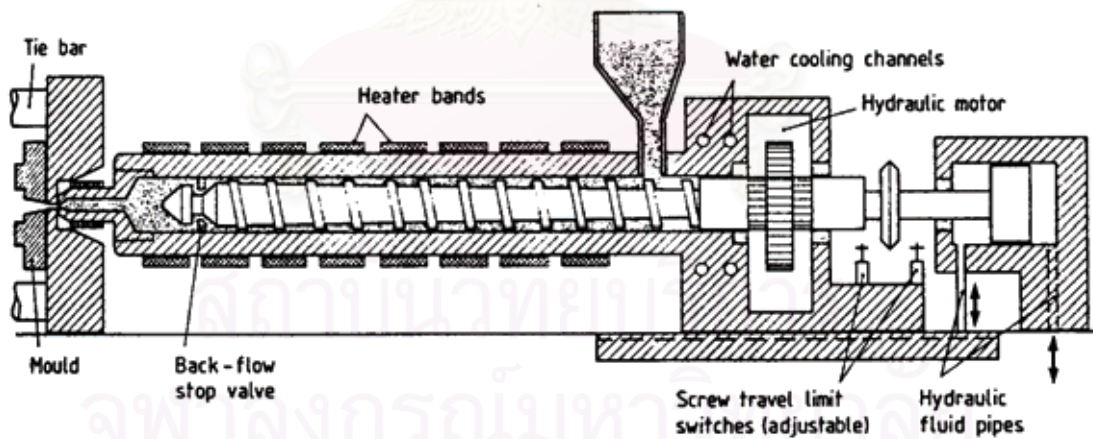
Single screw injection moulding machine : the injection unit [8] .
